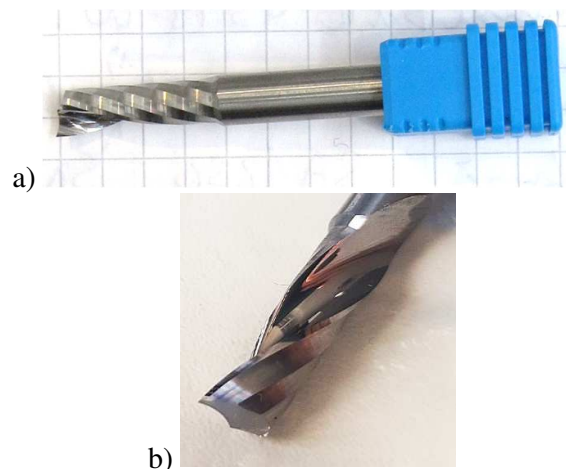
Uncoated polished solid carbide end mill used for machining experiments: a) overall view (the mat grid is 5 mm); b) front view with detail of the tooth and helix.
